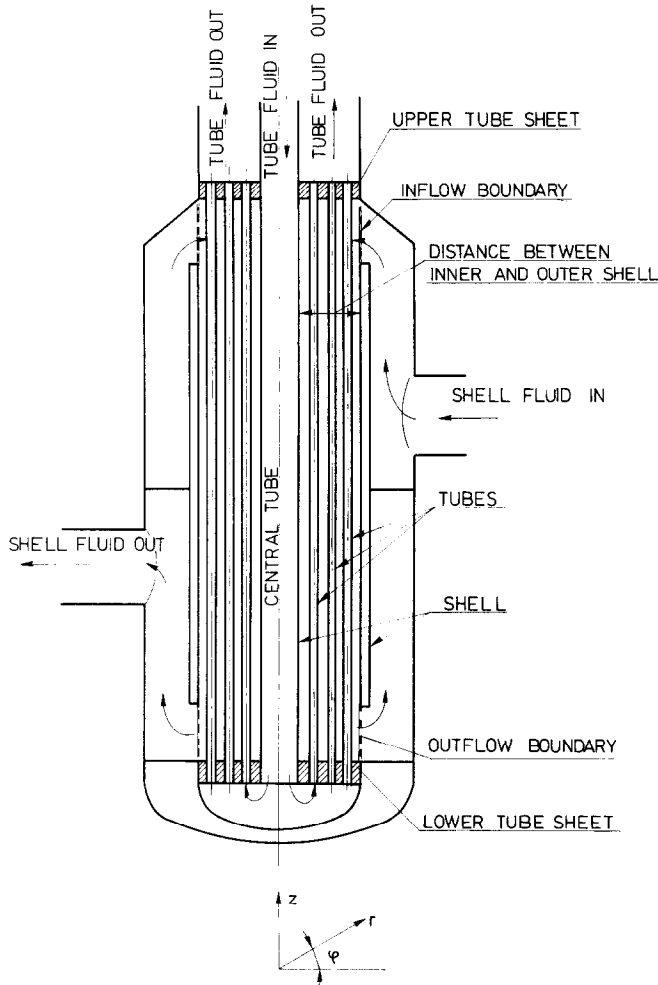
Example of straight-tube shell-and-tube heat exchanger.
